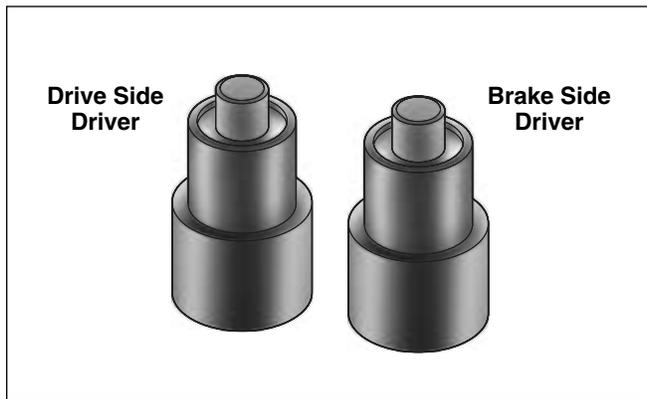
Rear Swingarm Bearing Installer (HD-45327)
